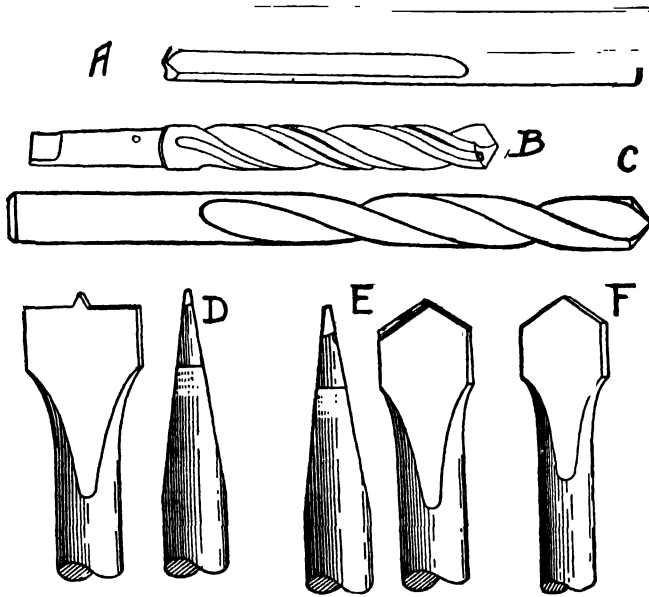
Forms of Drills Used in Hand and Power Drilling Machines.
